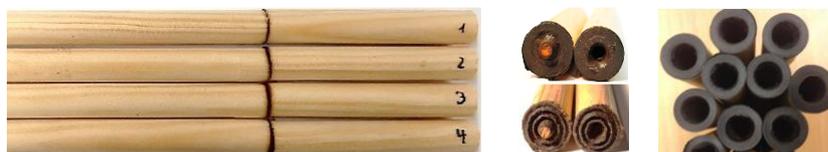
Friction welded wooden bars (left), cross-section surface after tensile break of wood (middle), bamboo (right).
